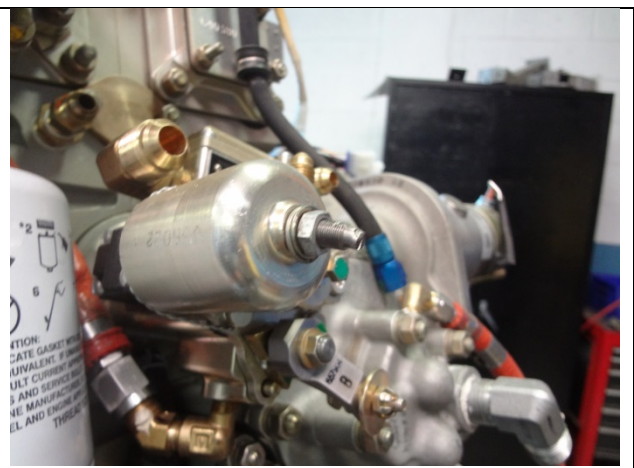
Damage to Aneroid Adjustment Screw as Viewed
